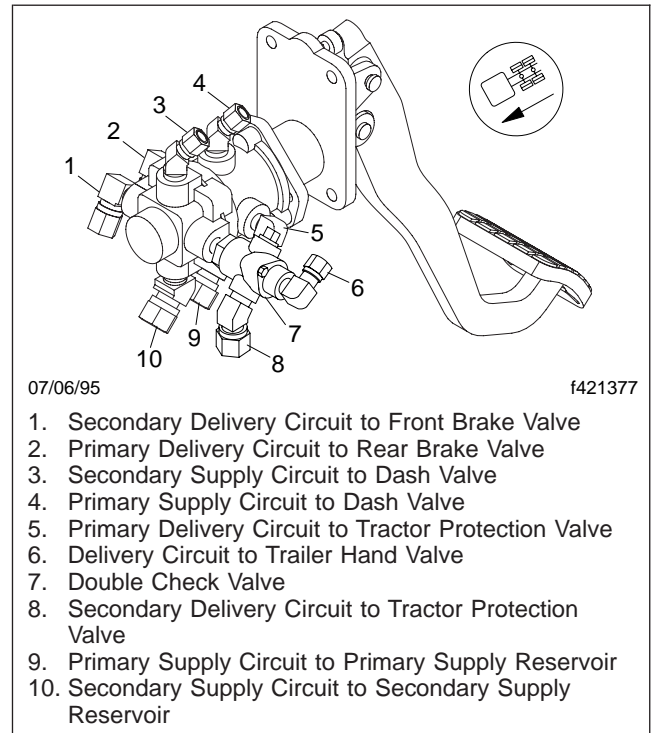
, Brake Valve Plumbing Circuits (with double-check valve)
